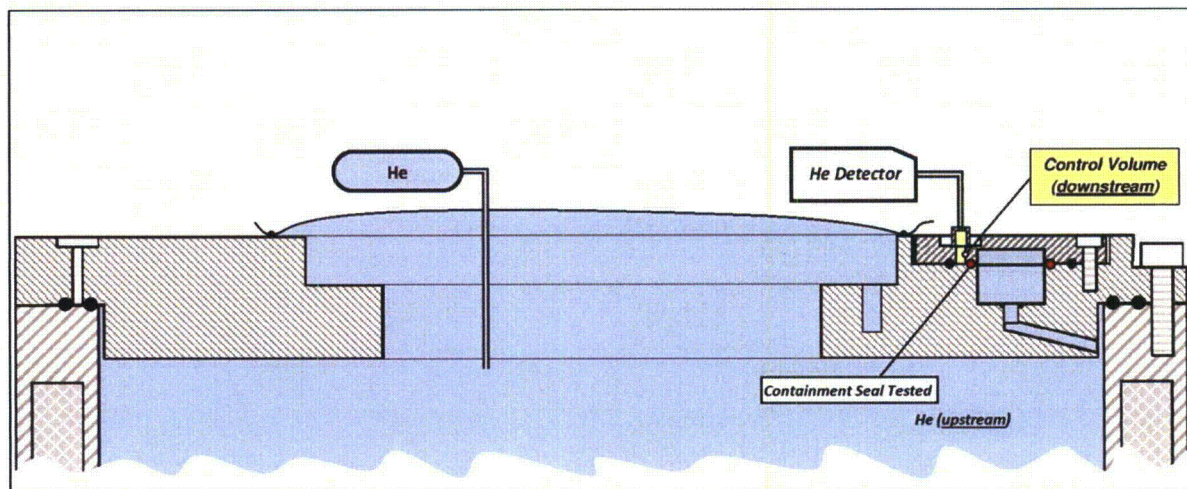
Alternate Test Apparatus for Measuring the Helium Leak Rate through the Quick Disconnect Valve Cover Plate
